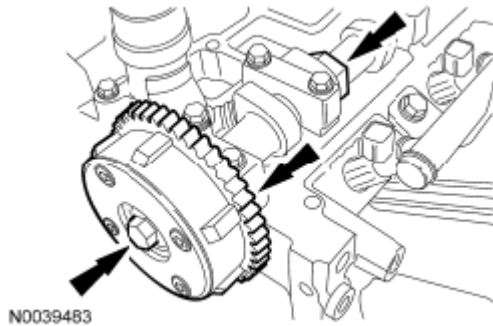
Locating Flats On Camshaft, Bolt, Camshaft Phaser & Sprocket
